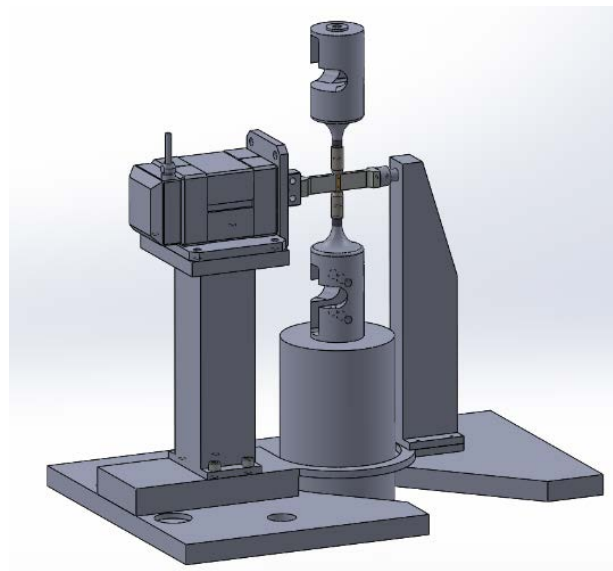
Solidworks Model of Piezoelectric Stack Mounting Design
